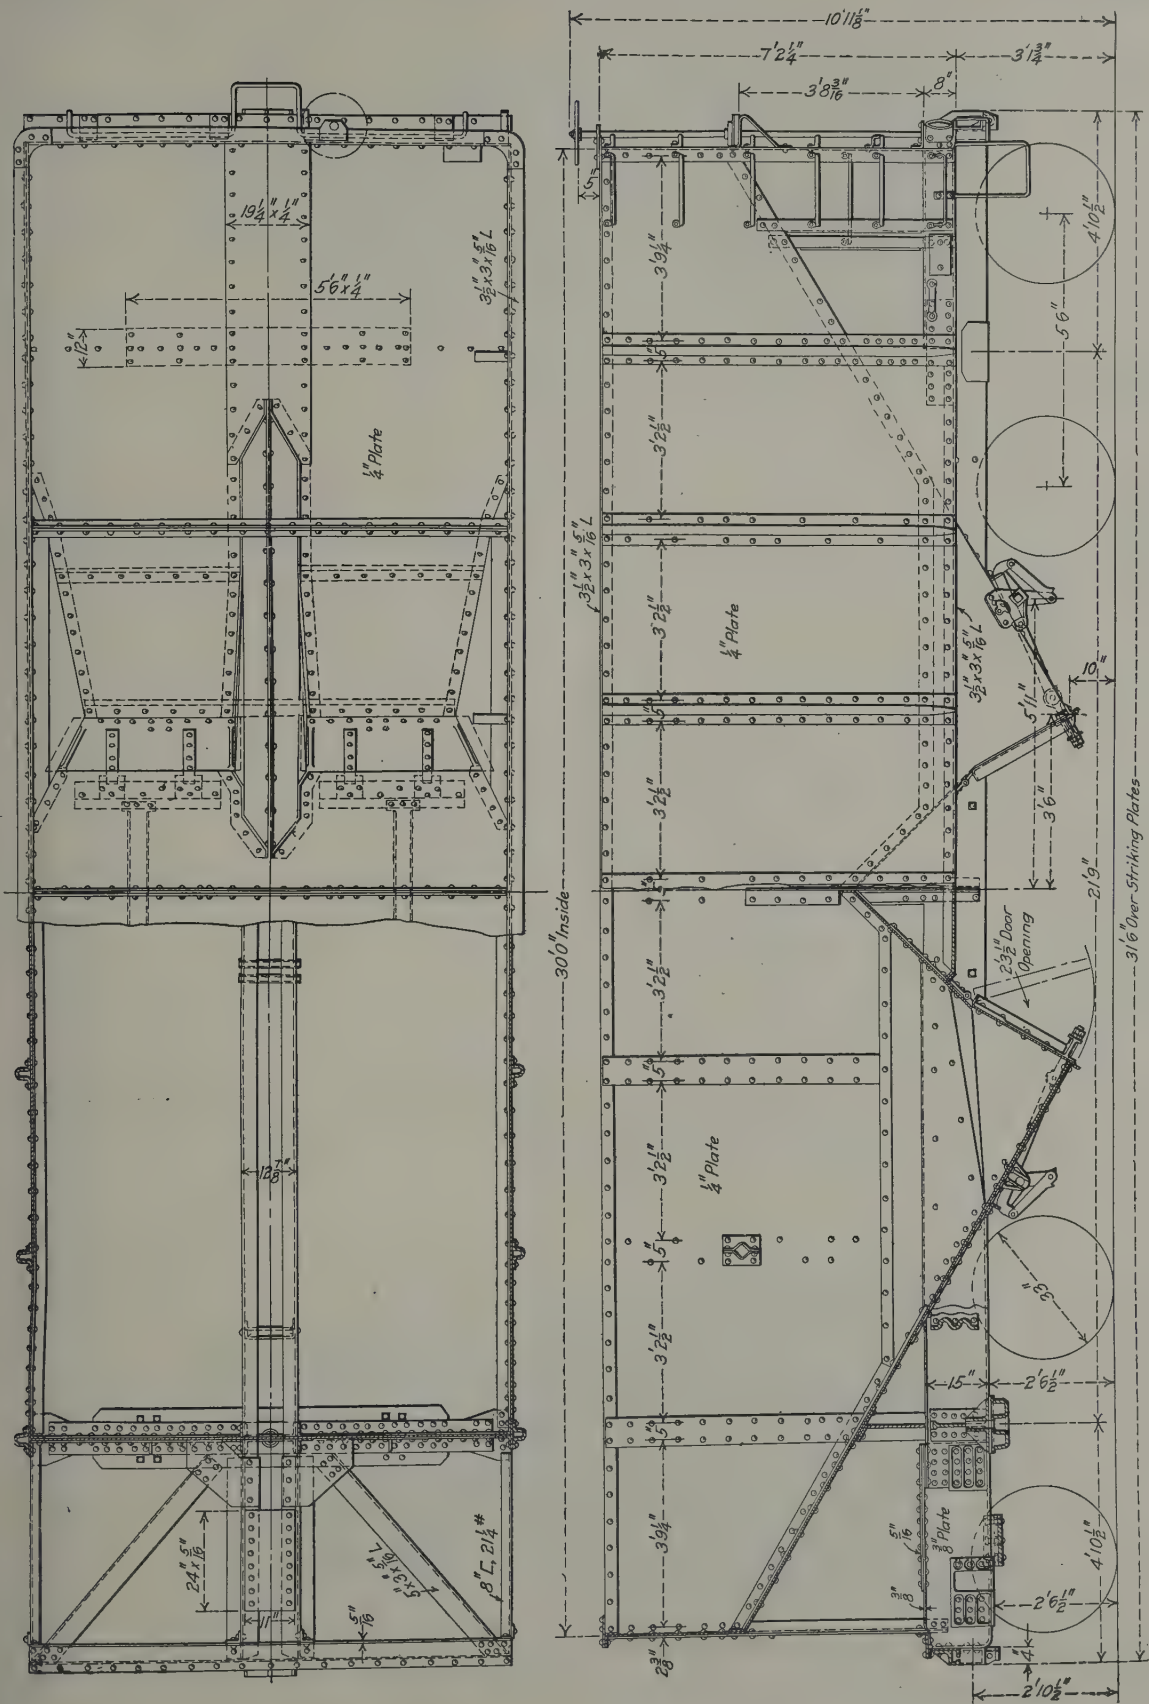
Central Railroad of New Jersey All-Steel 50-Ton Capacity Hopper Car. Builder, Standard Steel Car Company.
